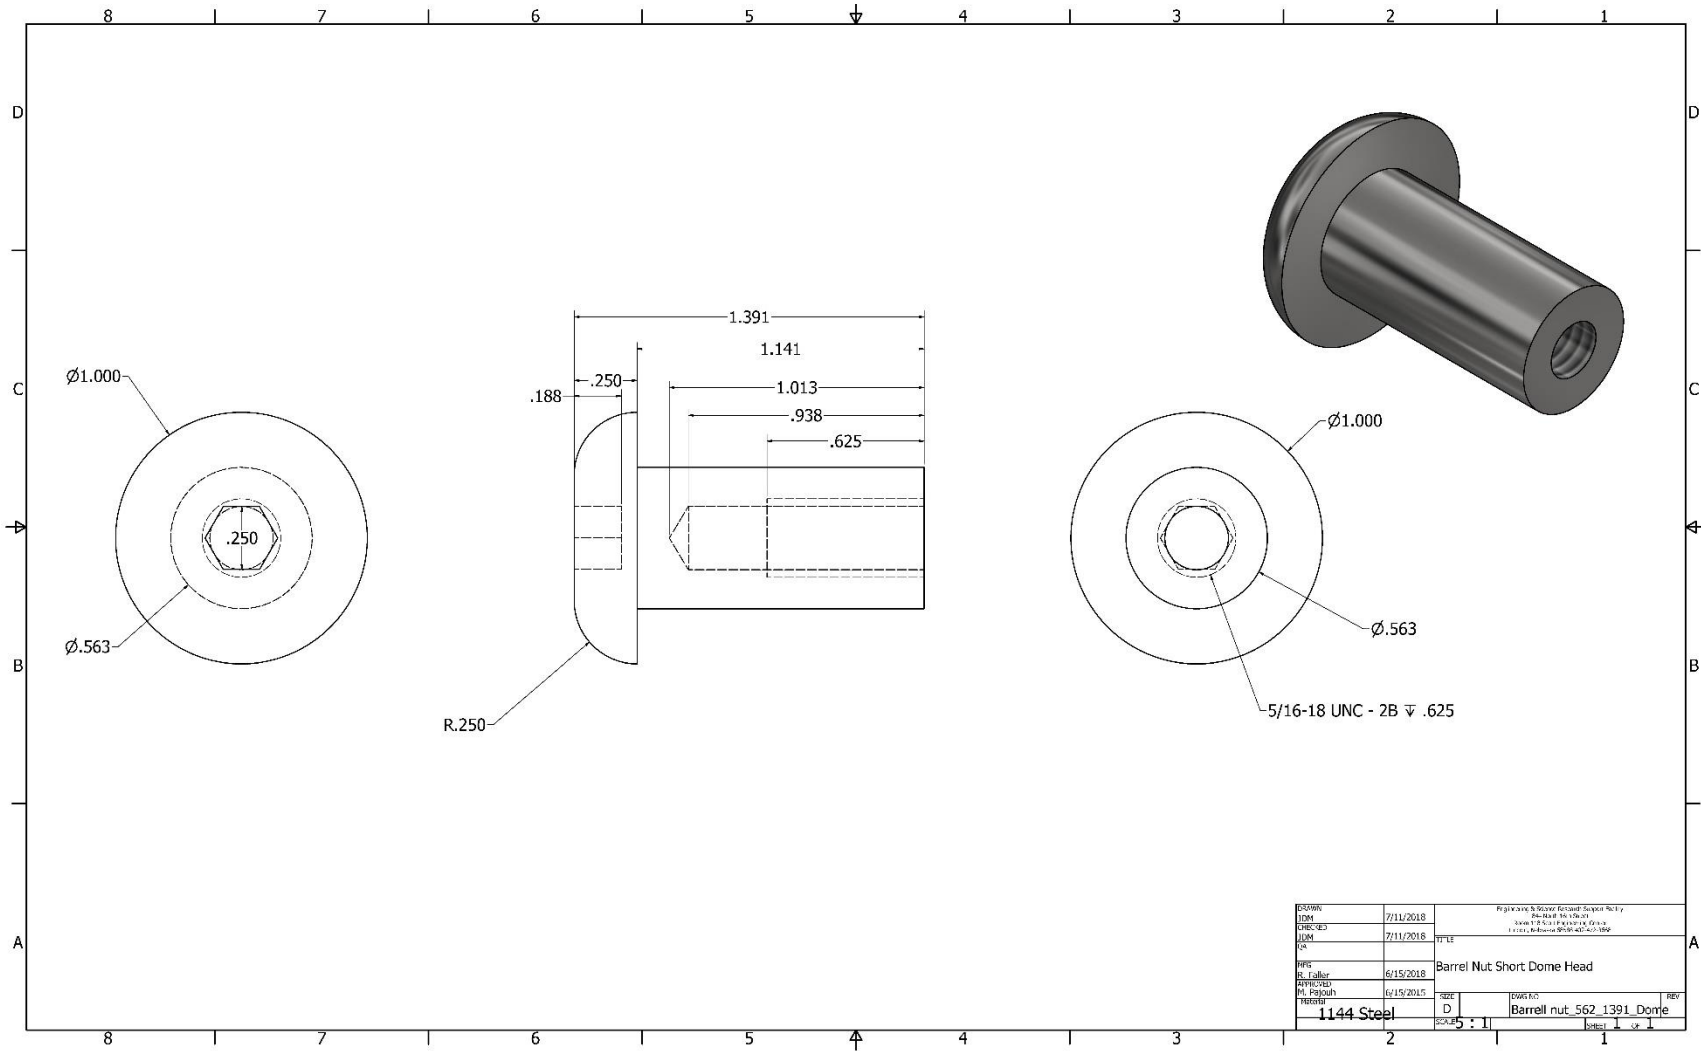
1.391-in. (35-mm) Long Barrel Nut with Dome Head Design
